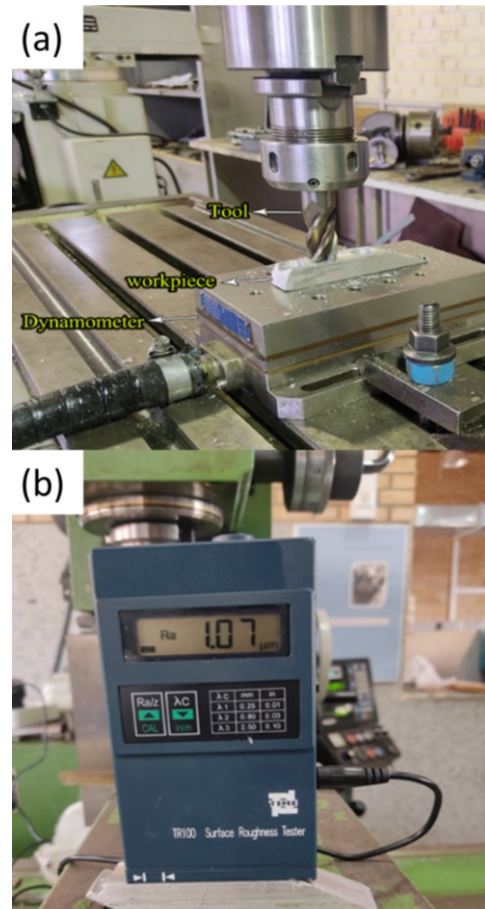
(a) Milling machine, tool, and dynamometer and (b) TR100 surface roughness tester.
